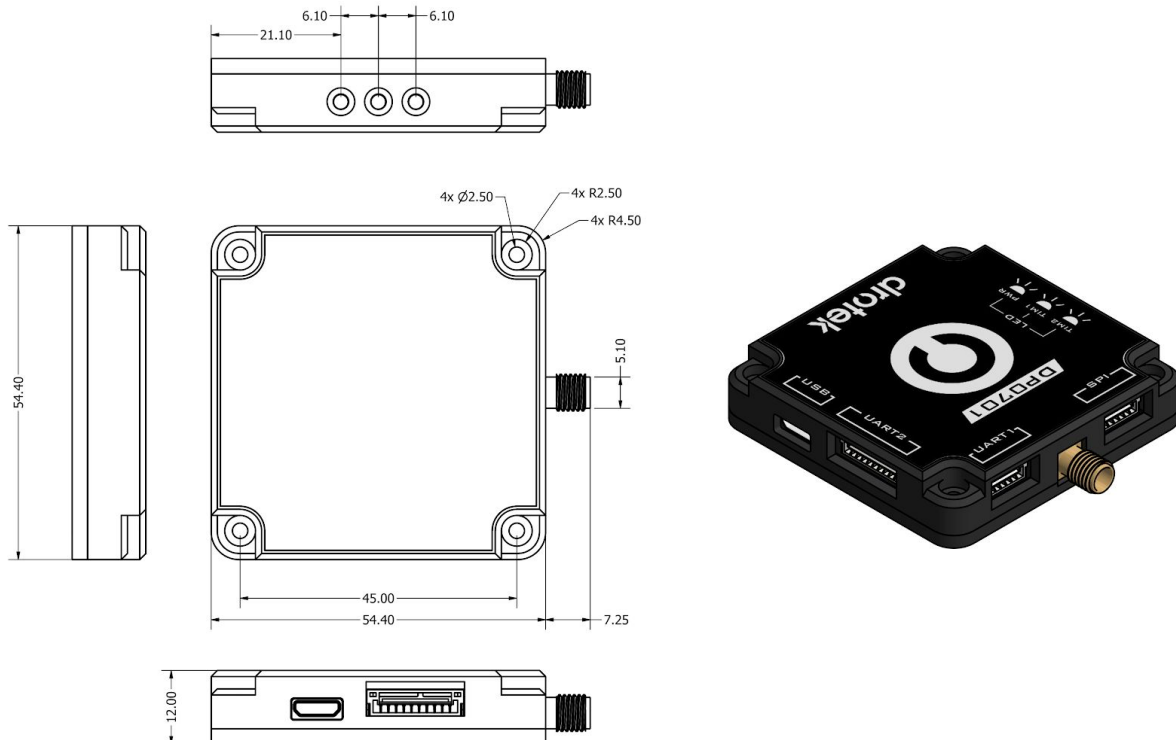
DP0701 v1.0 mechanical drawing enclosure version
